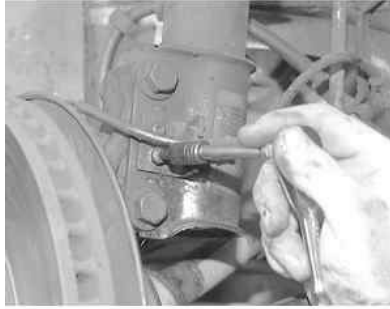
The strut is attached to the knuckle by two bolts (and nuts)
